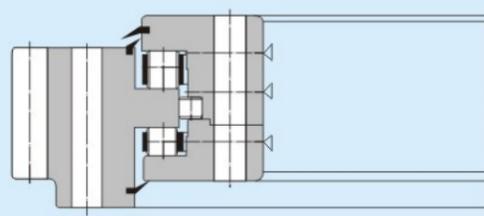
Three-row cylindrical roller combined bearing with external gear
